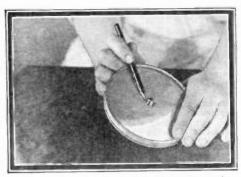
The bushing is then fitted through the center hole of the disc and the retaining nut is fastened down. Care must be taken that the insertion of the bushing does not throw the disc out of line.
